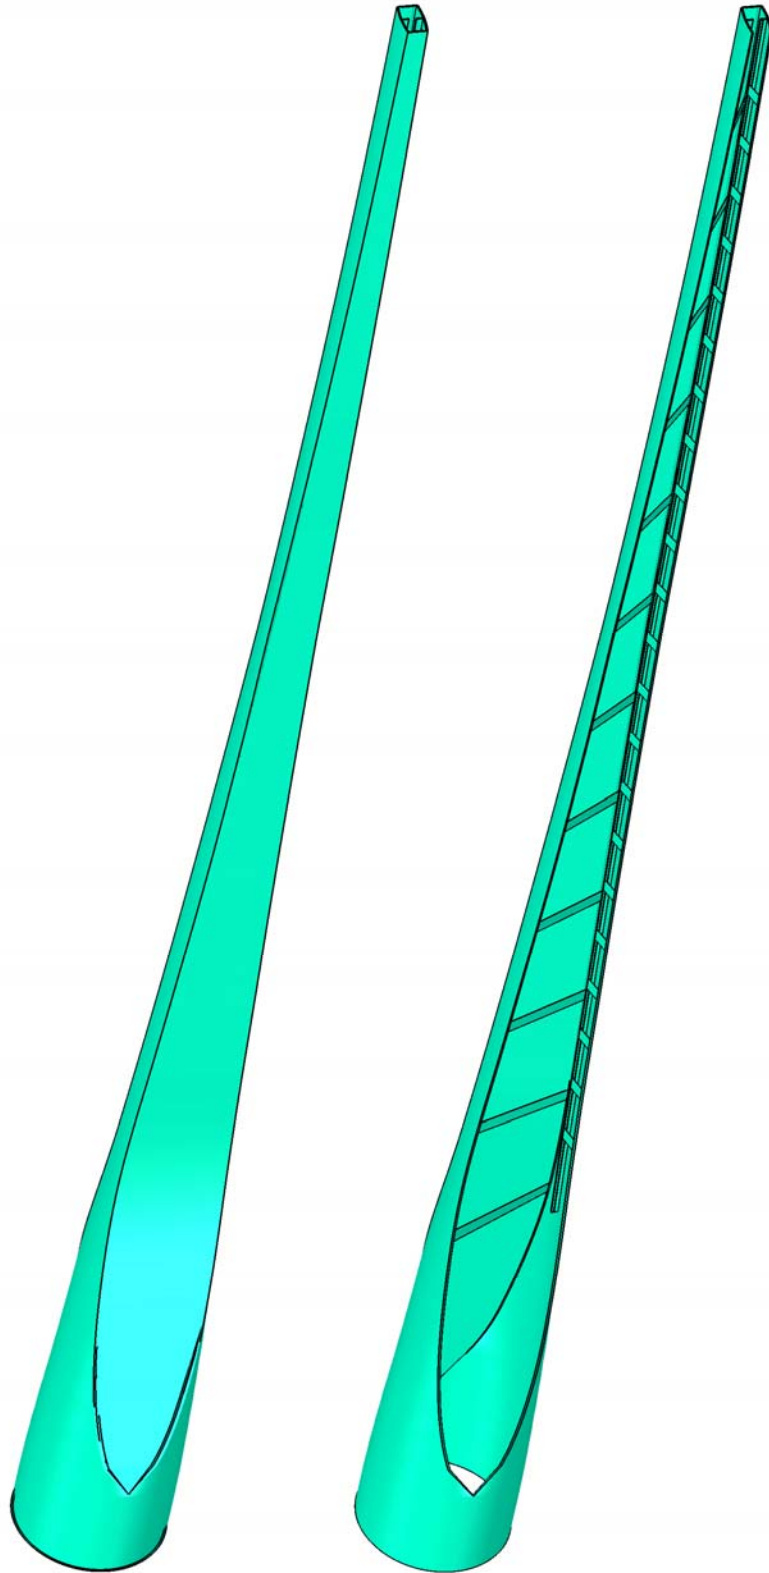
Schematic illustration of the box girder finite element model; left: complete model, right: leading shear web removed.
